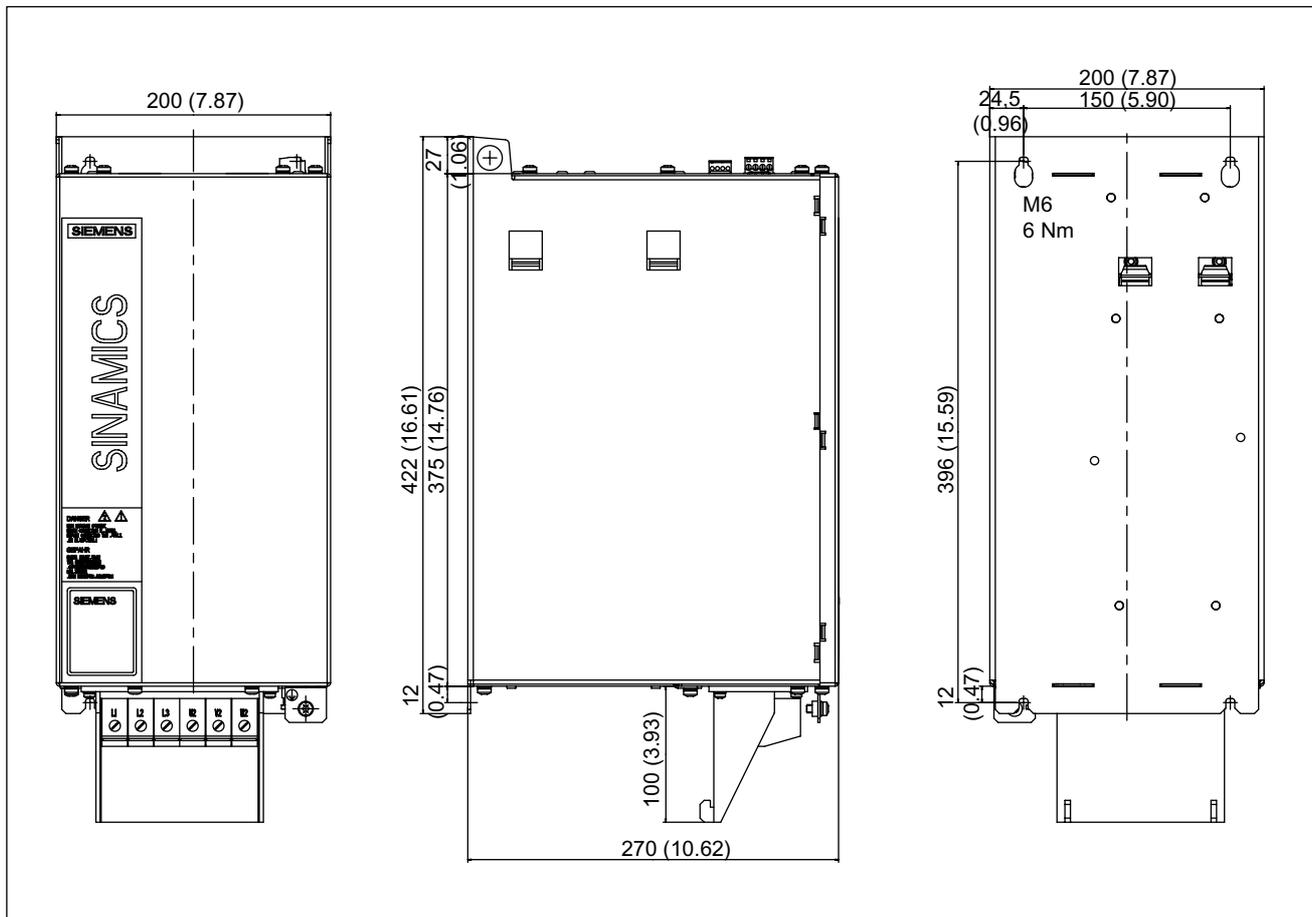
Dimension drawing of Active Interface Module 55 kW, all dimensions in mm and (inches)
